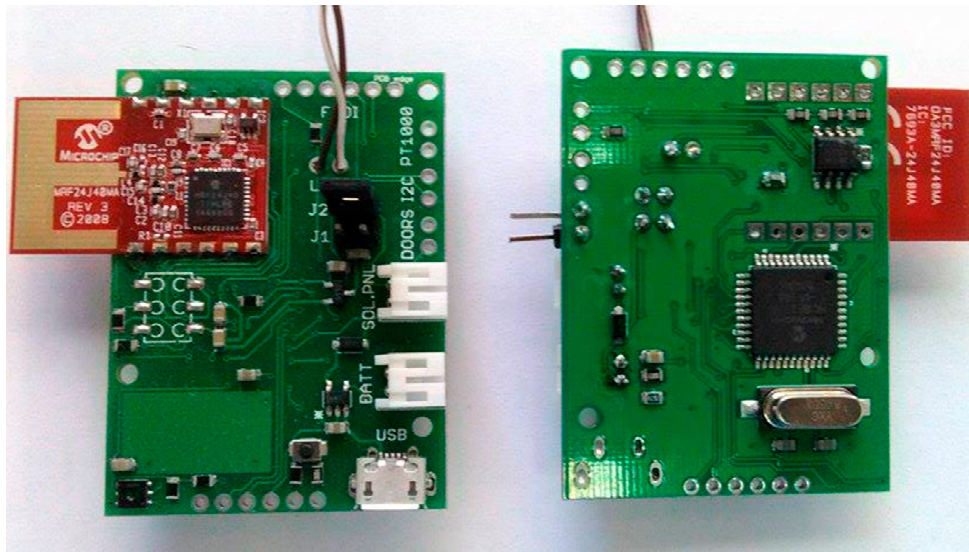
Both sides of the SPWS PCB prototype. PCB: printed circuit board.
